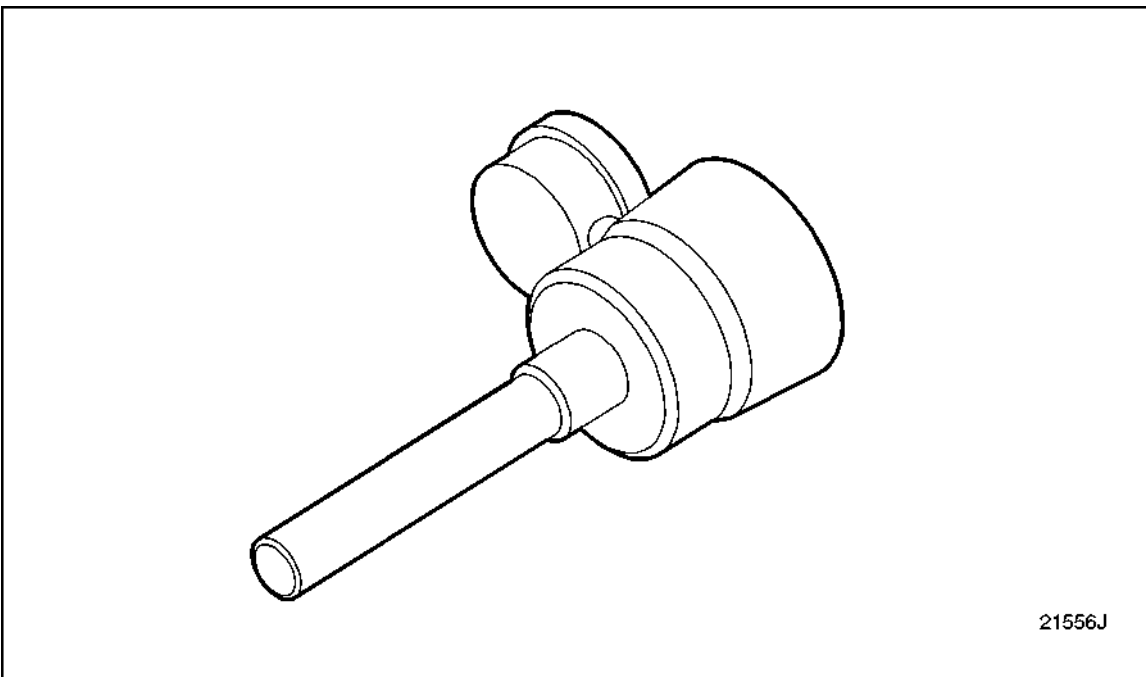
Valve Spring Tester (ON Cylinder HD), J 25076-B
